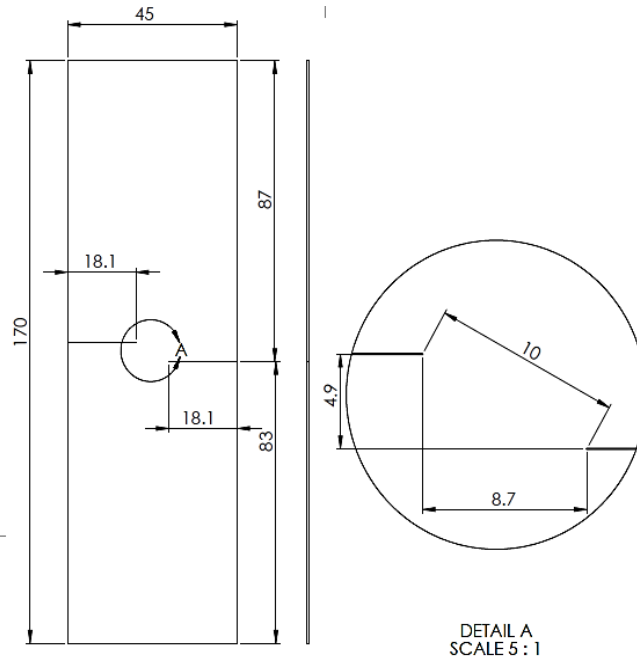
Staggered double-edge notched tension specimen (30°) with dimensions (mm).
